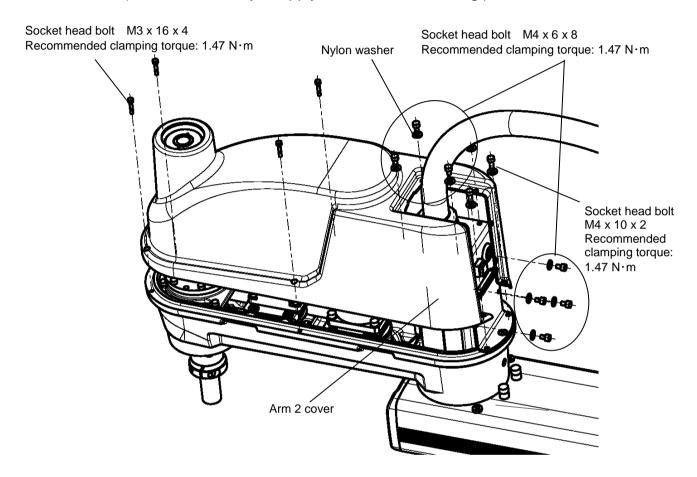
Arm 2 cover (KHL-500, KHL-600, KHL-700)
